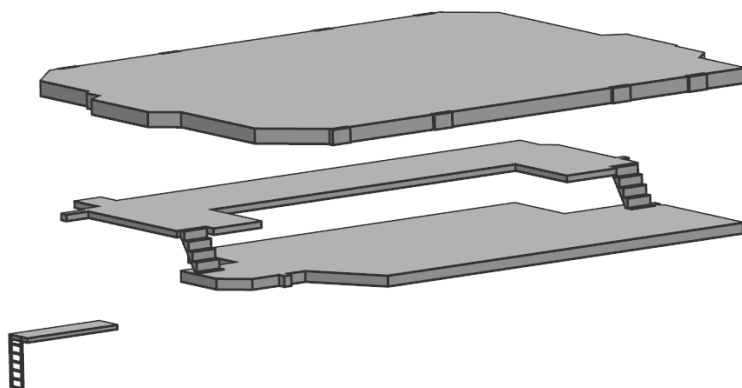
The 3D CAD model of the Platform Outline View (DG 7602-02) for a 7X82-2.0 engine
